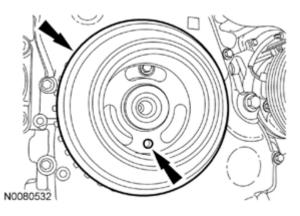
Locating Position Of Crankshaft Pulley Hole Courtesy of FORD MOTOR CO.
